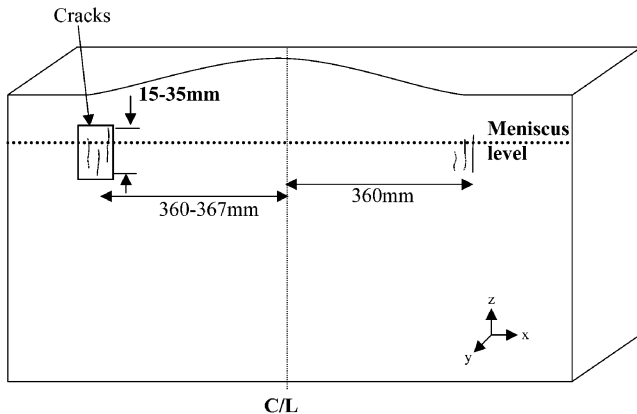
Schematic diagram of the funnel mold showing the location of mold cracks.
